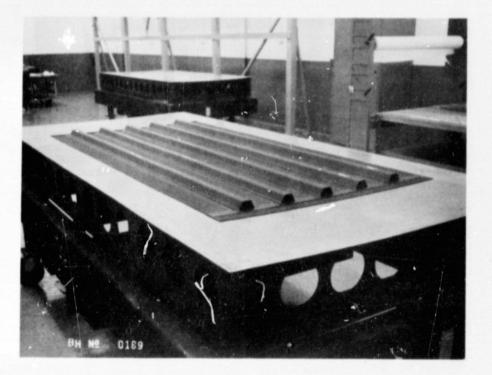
Specimen No. 28 After Bonding Hats to Skin on Bonding Tool
